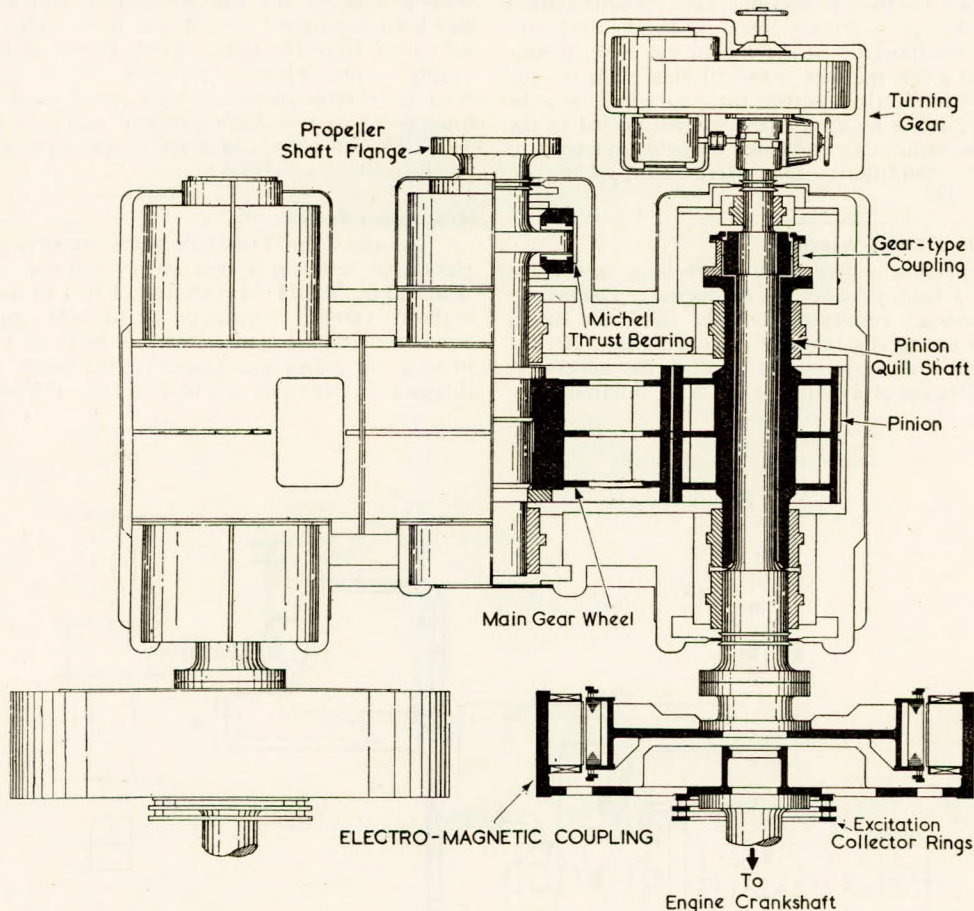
Arrangement of electro-magnetic couplings and gearbox
